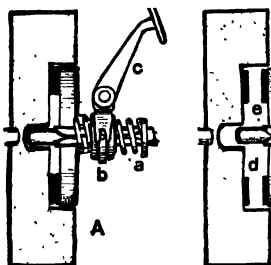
A simple type of clutch. A, clutch engaged. B, clutch disengaged.
